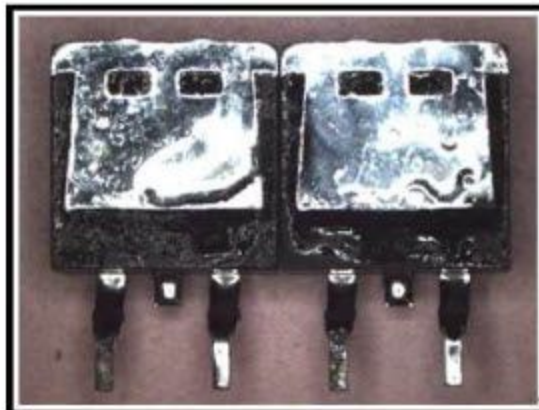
External inspection of the bottom of the device package with de soldered leads
